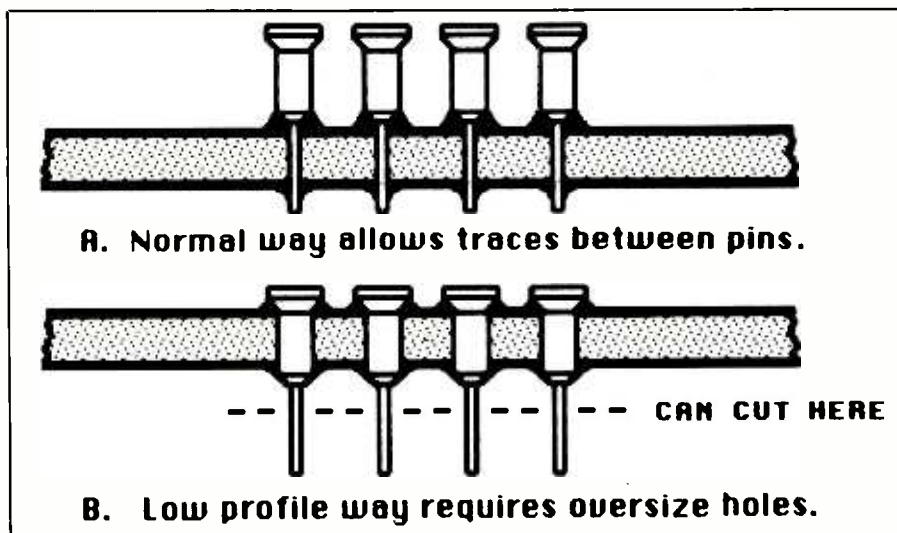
Plated-through circuit boards can be faked by using pins from machined-contact DIP sockets. This approach is far simpler and cheaper for prototyping.
